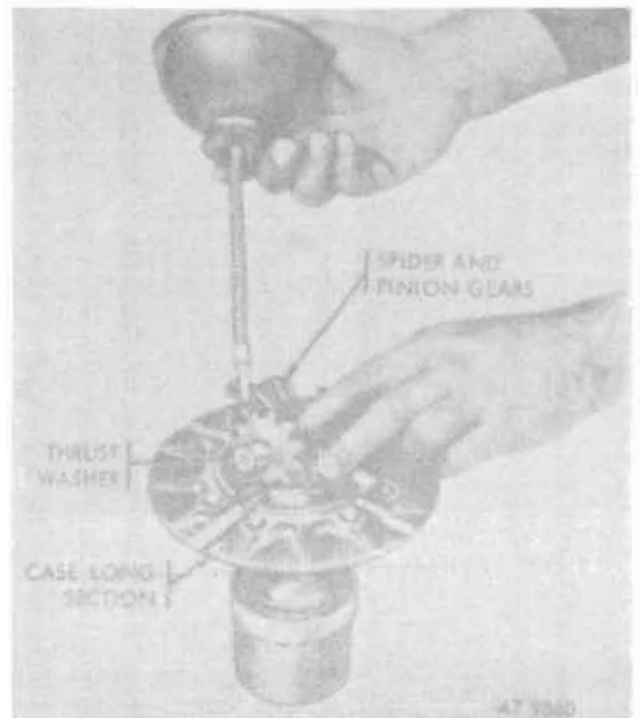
Lubricating and installing spider, spider pinion gears, and thrust washers.
